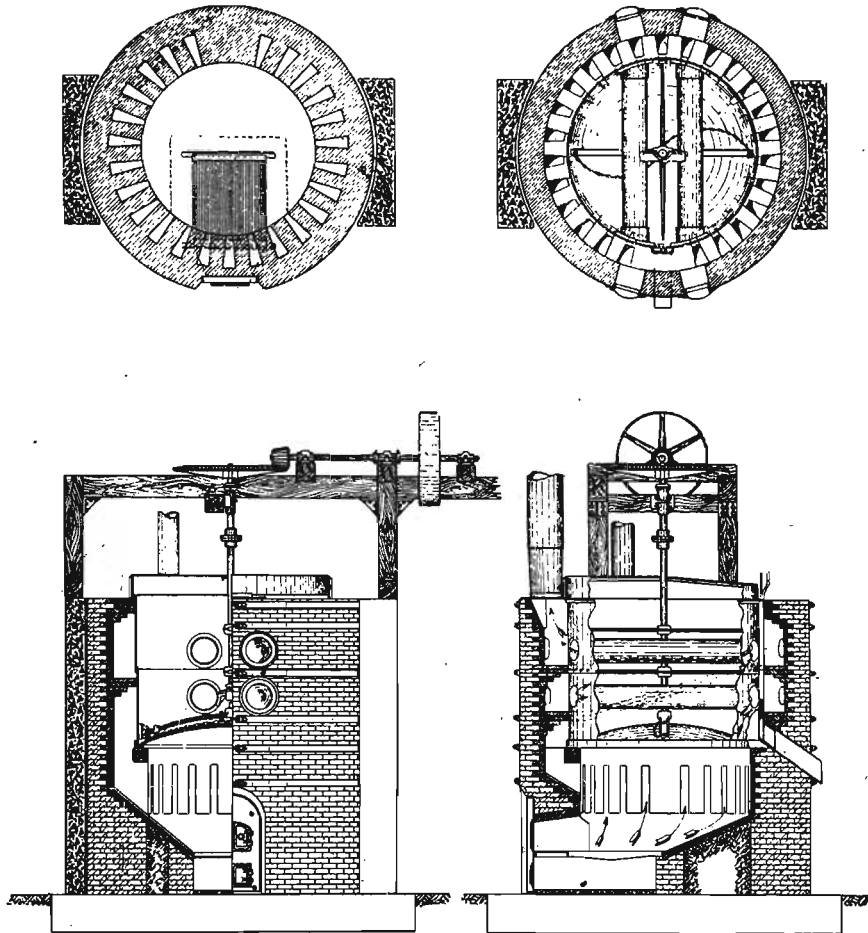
Diagram illustrating calcining kettle and setting. In figure in upper right hand corner note the two stirrers and chains dragging the bottom, attached to lower stirrer. Courtesy Ehram Mfg. Co.
